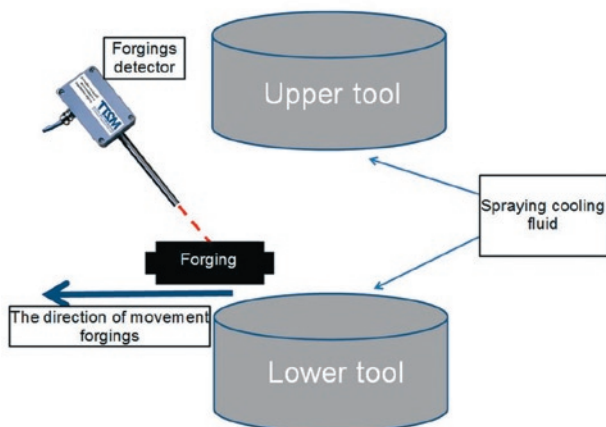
Schematics of the elaborated tool lubricating system, which also assures removing of the scale and drying of the tools
